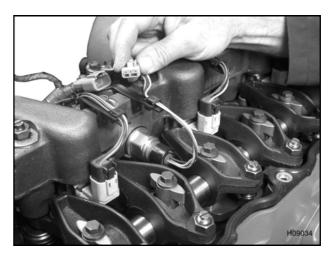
Injection Control Pressure (ICP) sensor electrical connector
